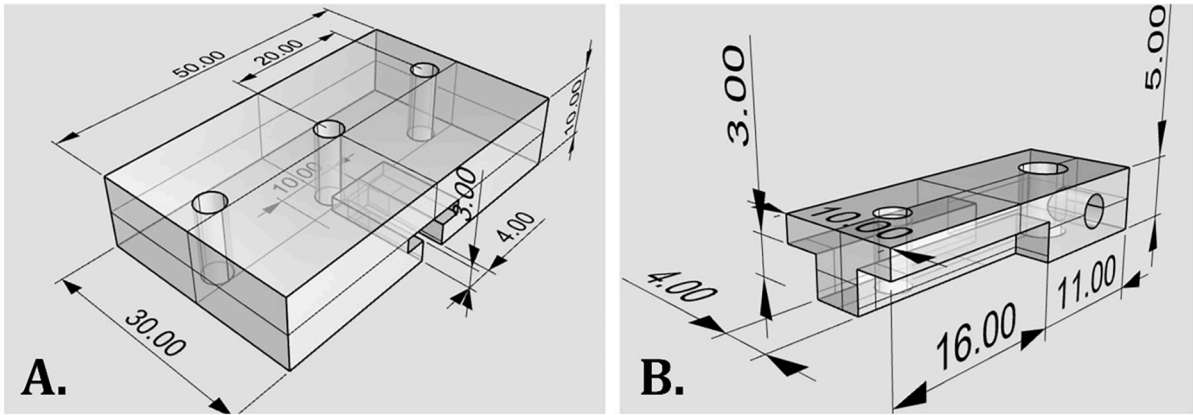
Pieces of the collecting tube driver. A) Pucher block of the vertical linear actuator; B) collecting tube holder (11).
